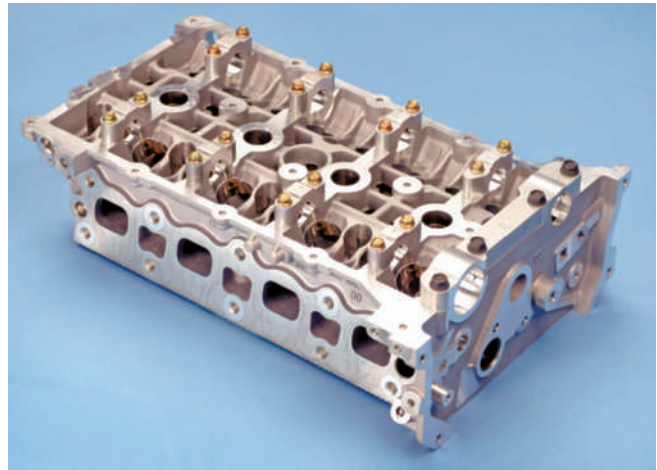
A cylinder head for a late-model inline four-cylinder engine.
